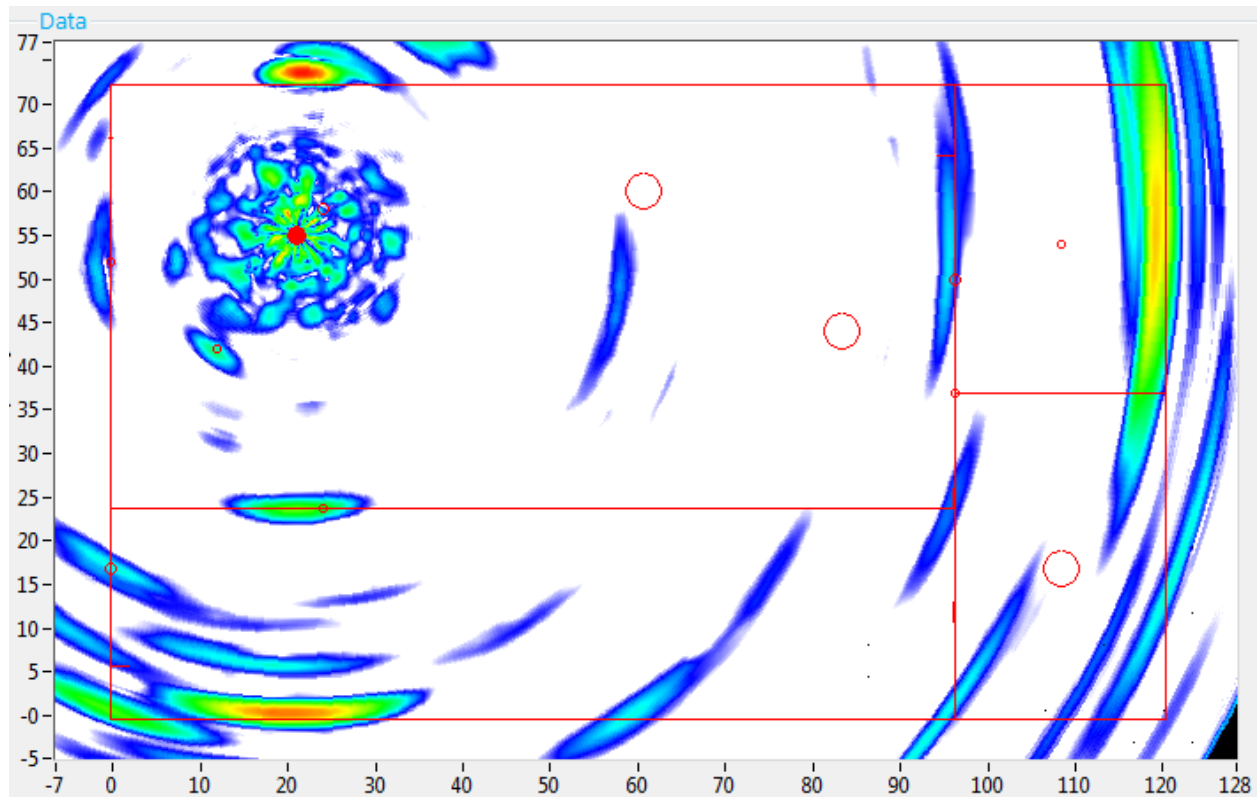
Composite image of the transition weld showing detection of flaws N5, P7, P6, P11, and the heavily repaired weld area.
